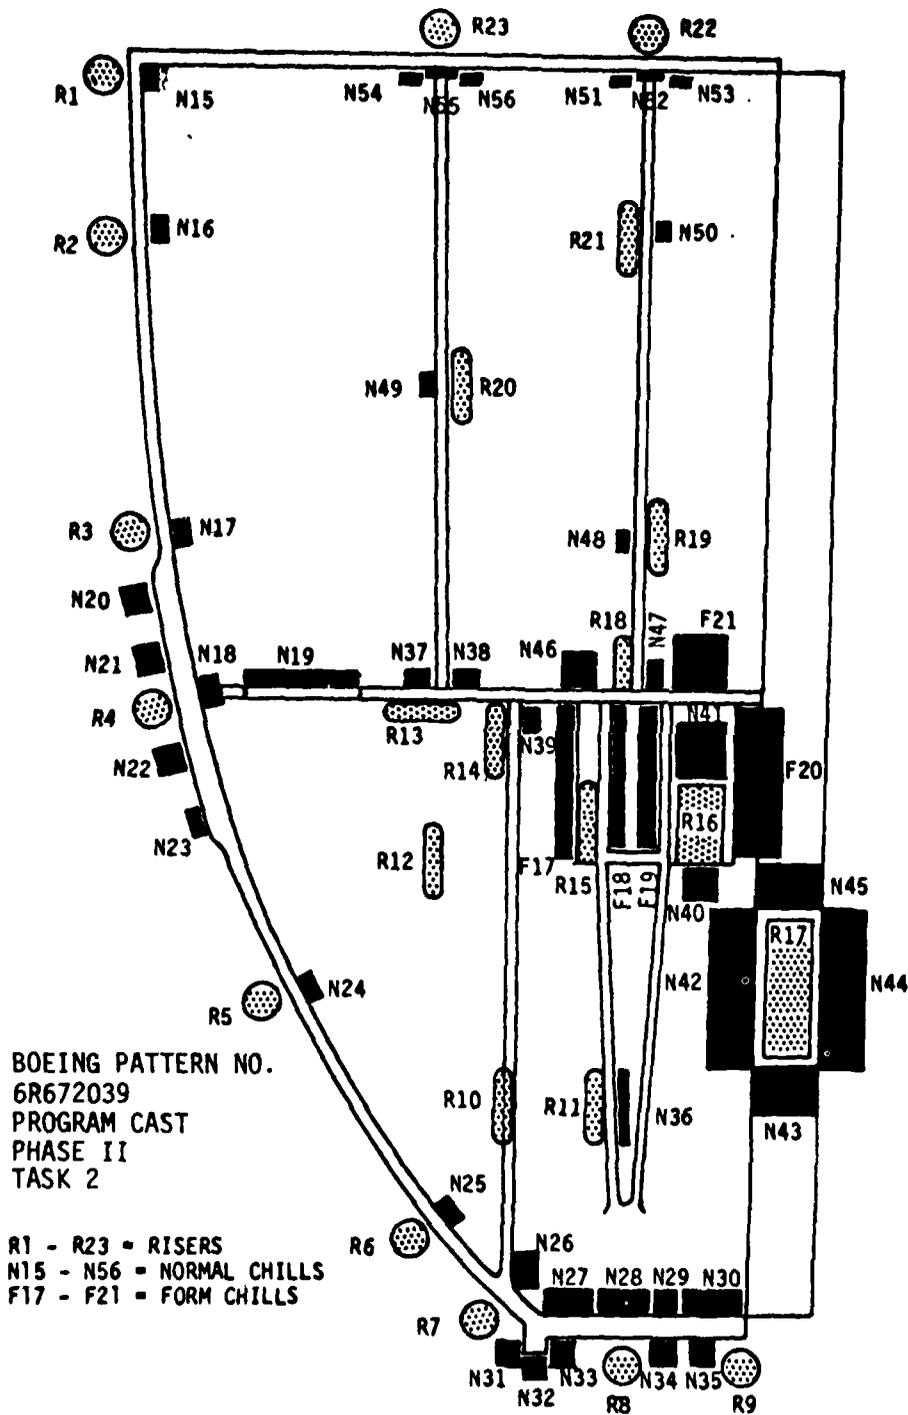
DETAILS OF COPE HITCHCOCK CASTINGS PART A
